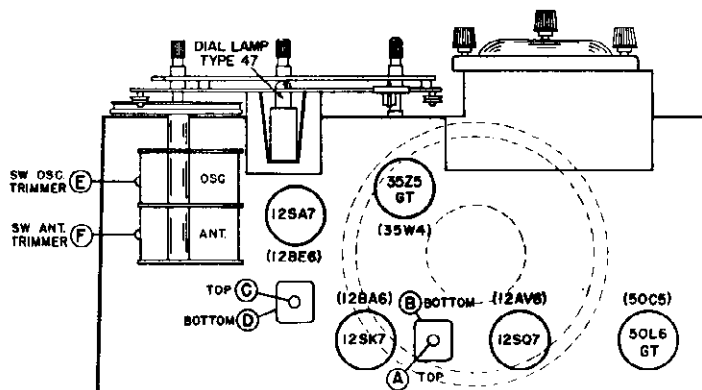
Top View of Chassis Showing Location of Tubes and Alignment Adjustments
